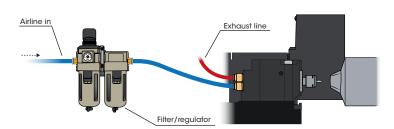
A clean airline from a filter/regulator to a mounted Air Turbine Live Tool® with exhaust hoses installed.
